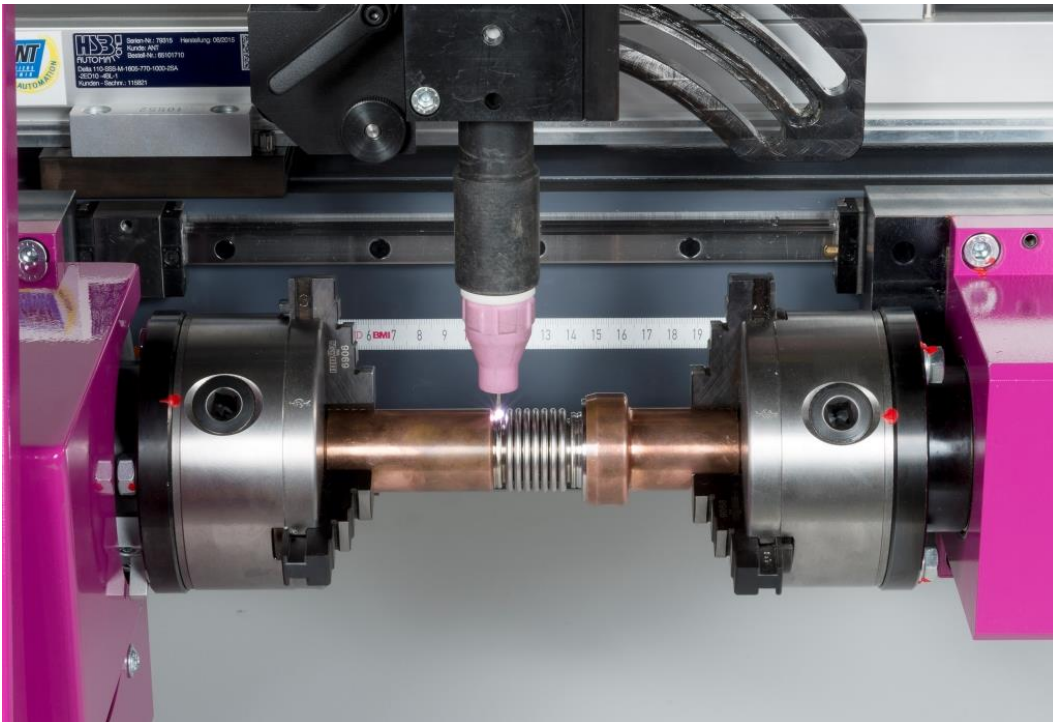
Welding of a flange to a metal bellow (chucks and part holder optional)
